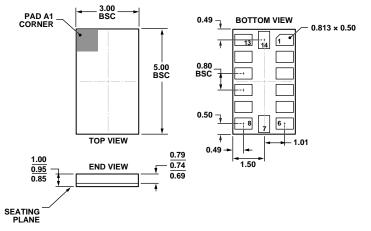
14-Terminal Land Grid Array [LGA] (CC-14-1) Solder Terminations Finish Is Au over Ni Dimensions shown in millimeters
